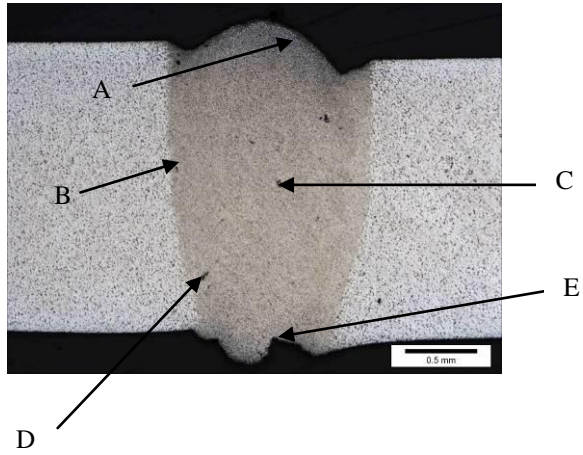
Solidification Cracks in the Sample Welded at 3 kW – Middle Section
